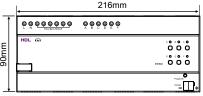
KNX 6CH 1.5A MOSFET Dimming Actuator
